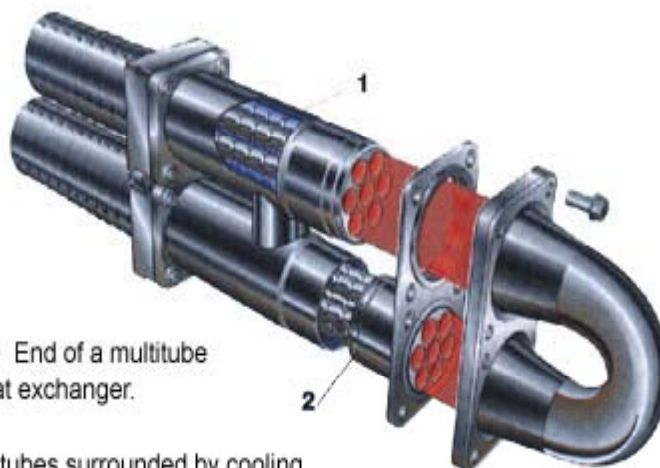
End of a multitube tubular heat exchanger.
